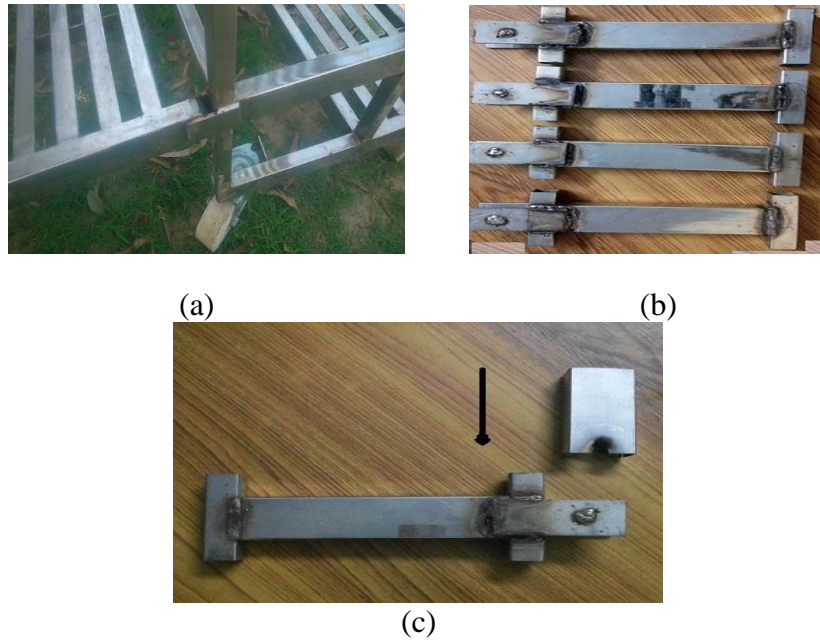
(a) Actual stand joint (b) Fabricated welded joint2 (c) Load apply direction
